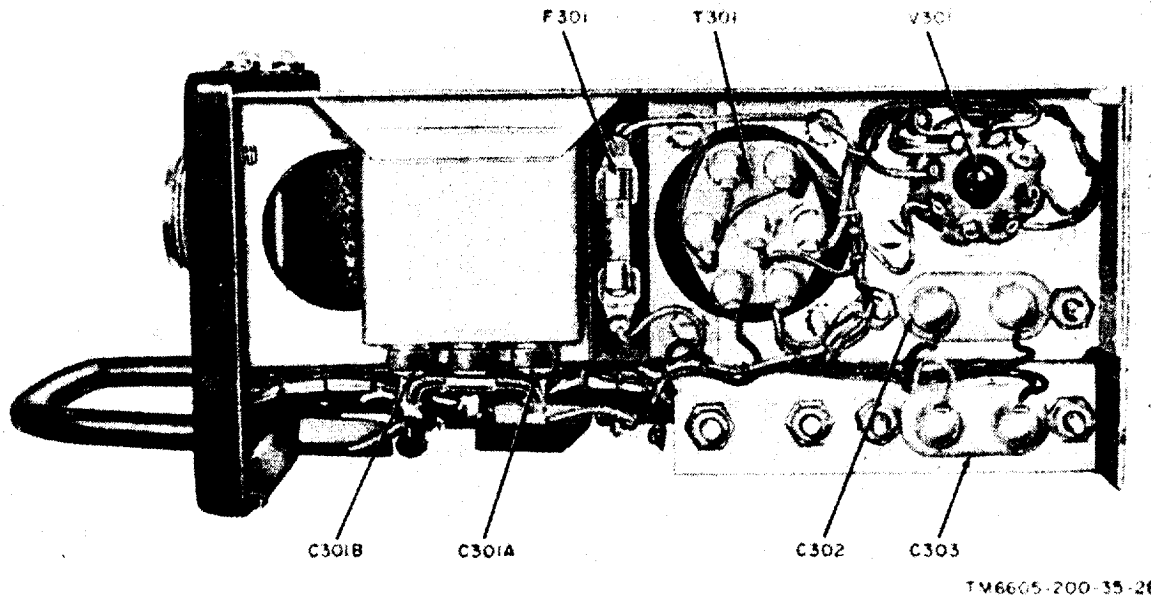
Repeater Amplifier Type B-7A, bottom view of chassis showing parts location.
